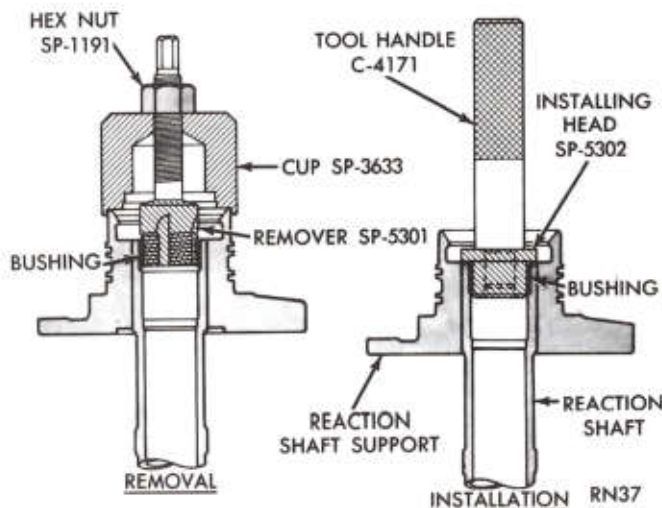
Replacing Reaction Shaft Bushing (A-727)
